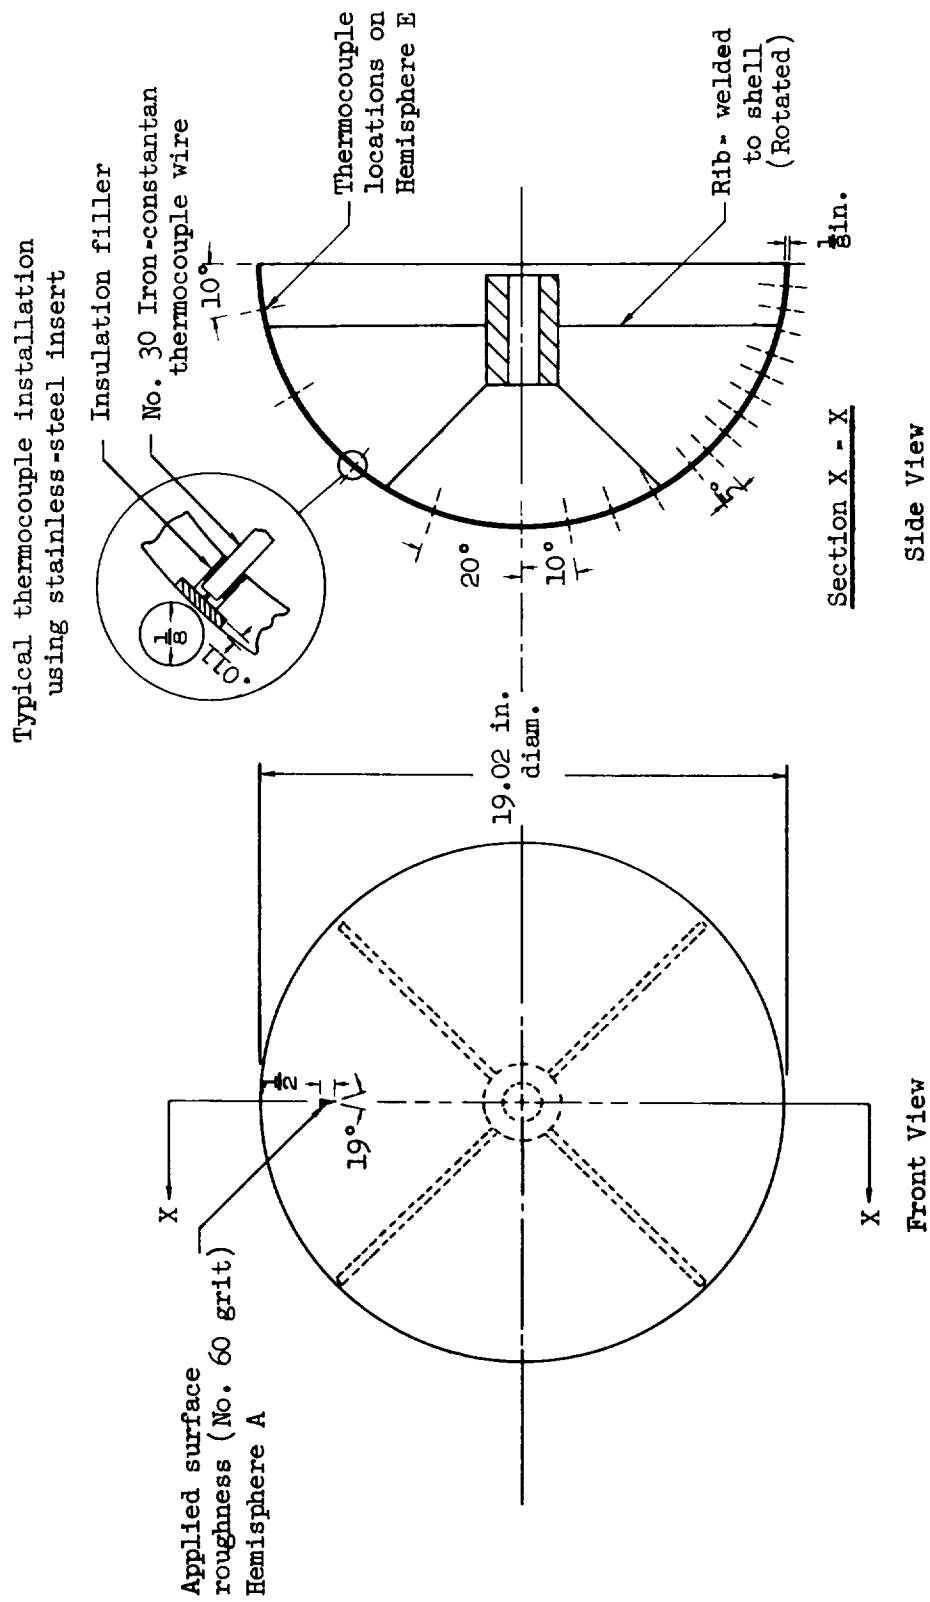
Sketch showing dimensions of stainless-steel hemispheres and location of thermocouples and applied surface roughness. (All dimensions in inches)
